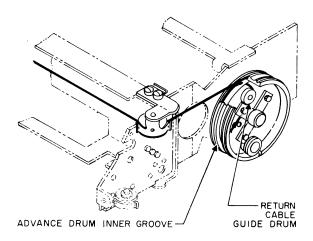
Return Cable Installation, Securing Cable to Advance Drum
